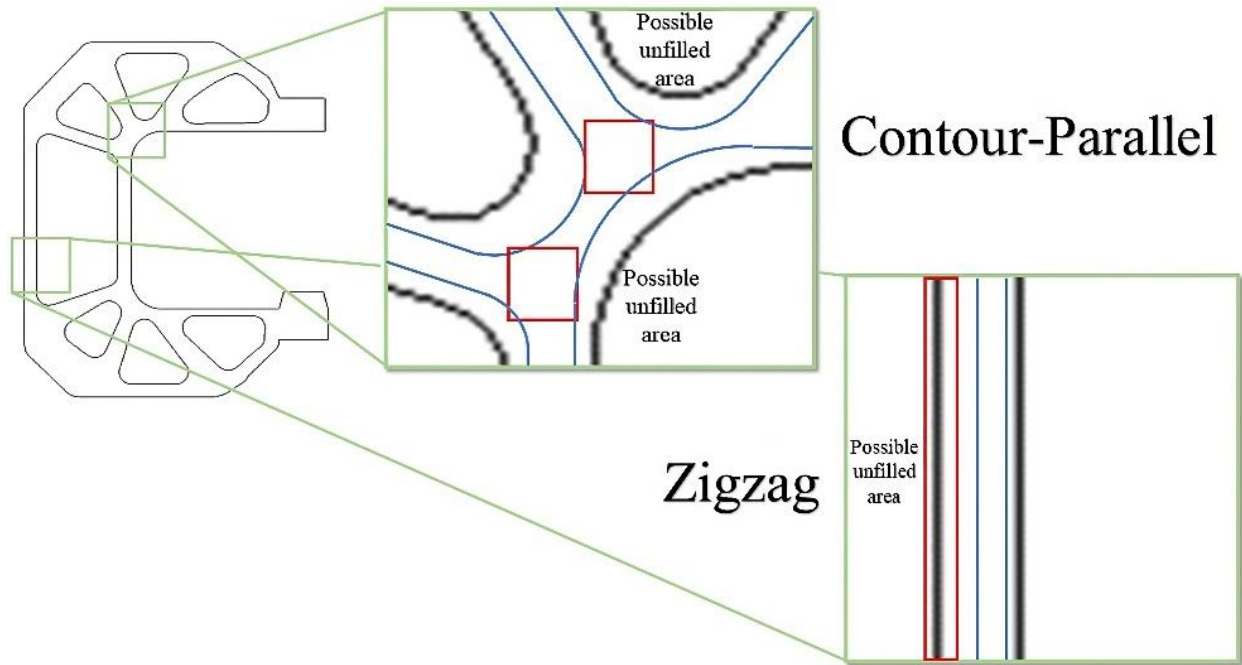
Highlighted problems when printing the C-frame spot welding gun using conventional strategies
